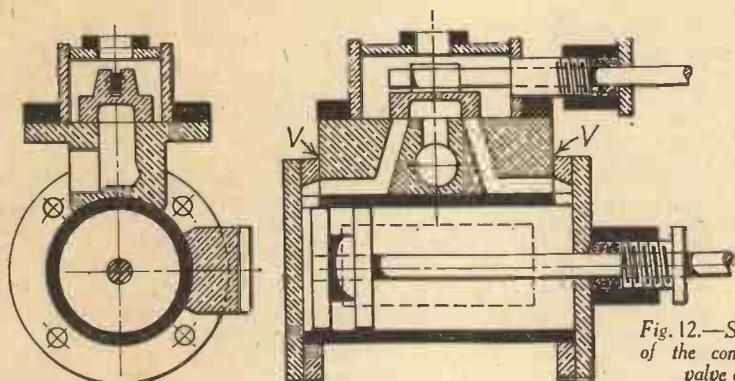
Sectional views of the completed slide-valve cylinder.
